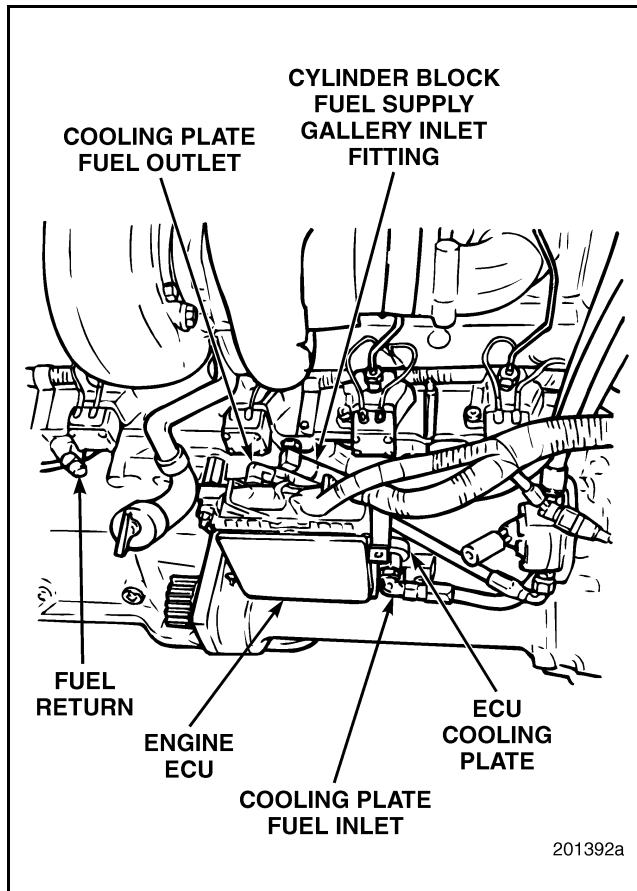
V-MAC III Engine ECU (Right-Side Mounted)
